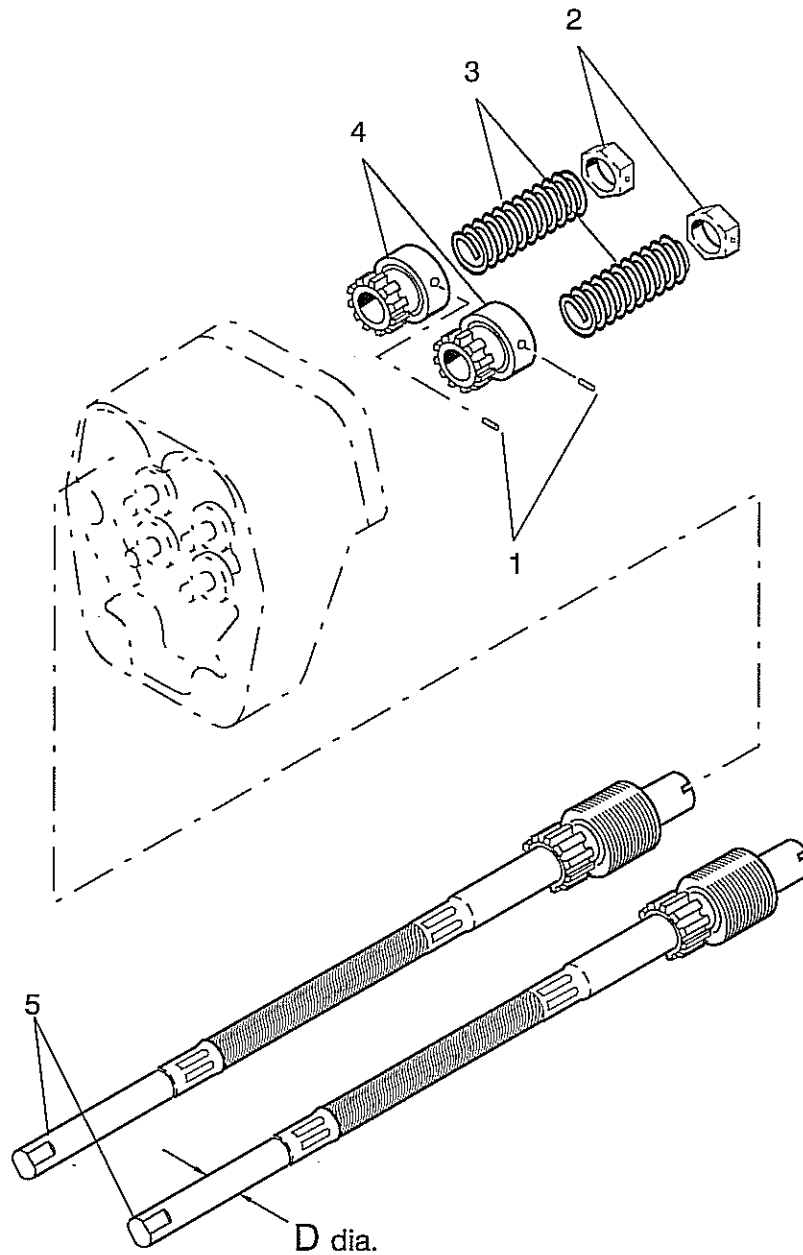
HOUSING SUB-ASSEMBLY
